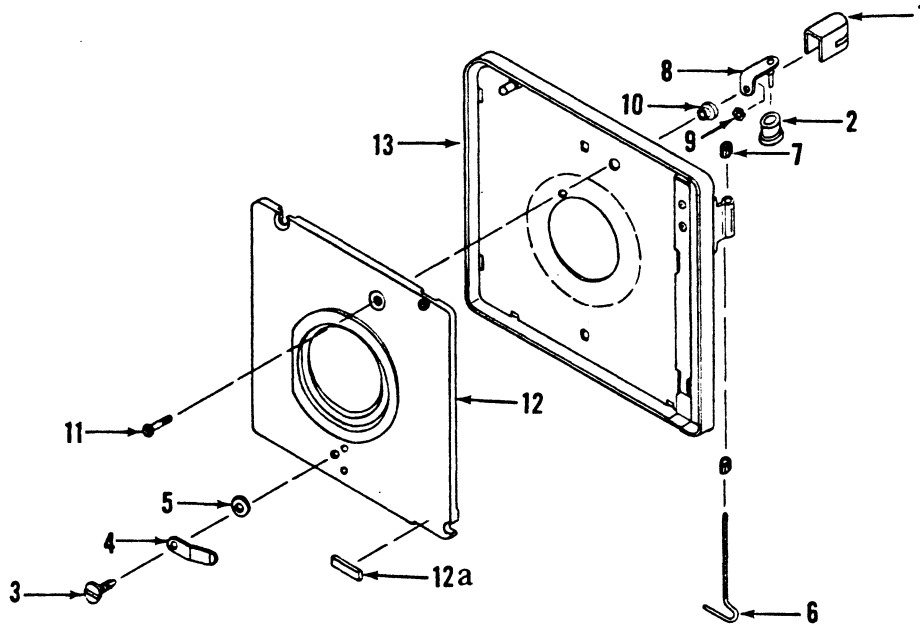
LENSBOARD COMPLETE FOR #0 SYNCHRO-COMPURE SHUTTER w/DIN Flash Fitting
